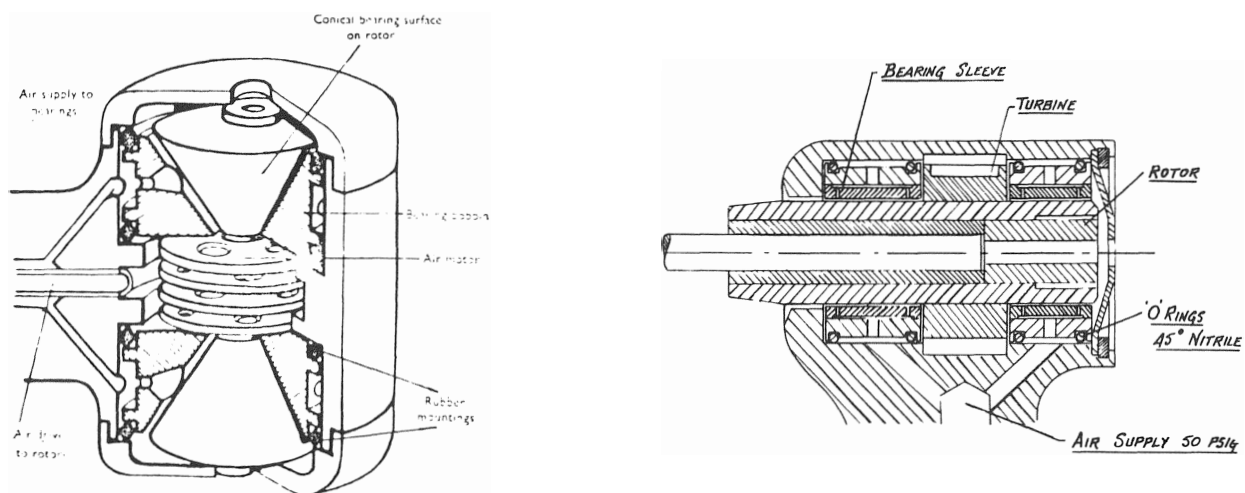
Air Bearing Dental Turbines. (conical shape by Encore Power Division, U.S.A. and straight shape by Westwind Turbines, Ltd., England).
